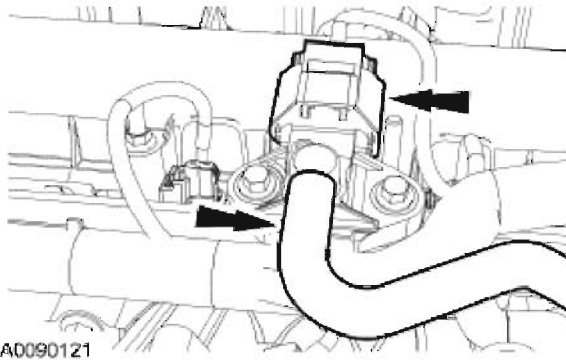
Locating Idle Air Control (IAC) Motor Electrical Connector
